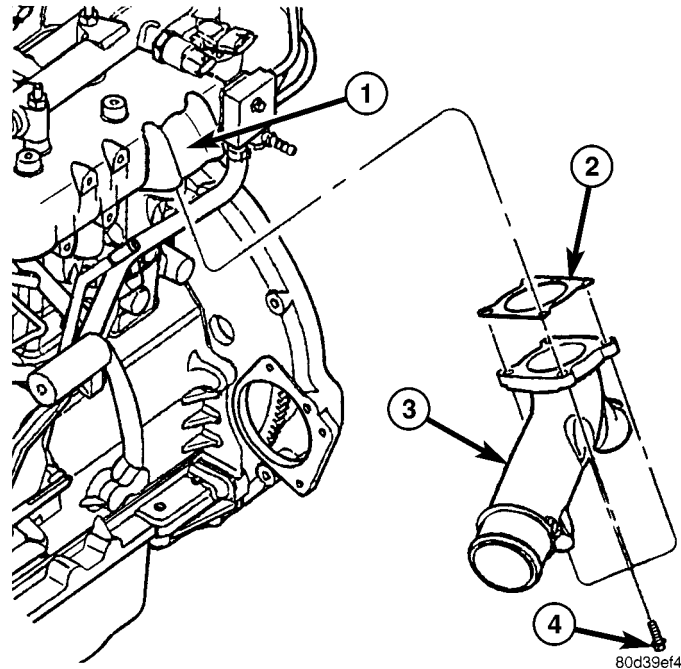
INTAKE MANIFOLD AIR INLET TUBE
